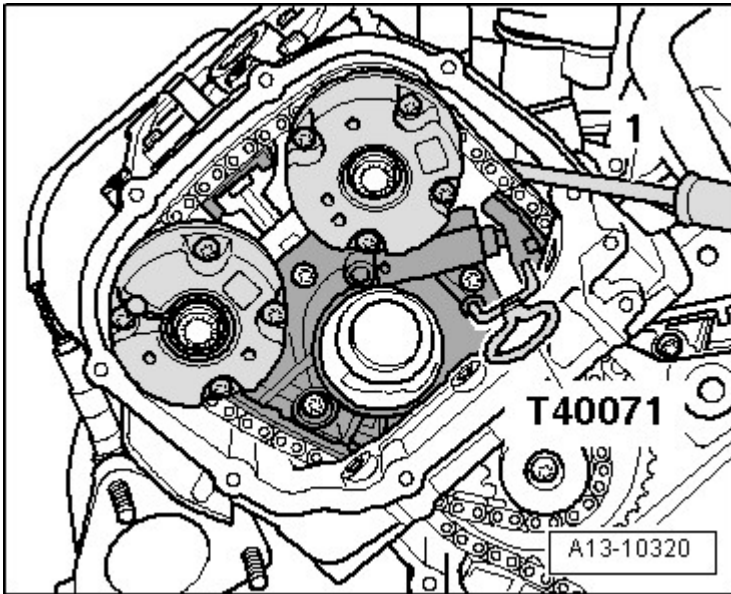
Pressing Left Camshaft Timing Chain Tensioner Glide Track Inward With Screwdriver As Far As Stop And Securing Chain Tensioner With Locking Pin T40071
